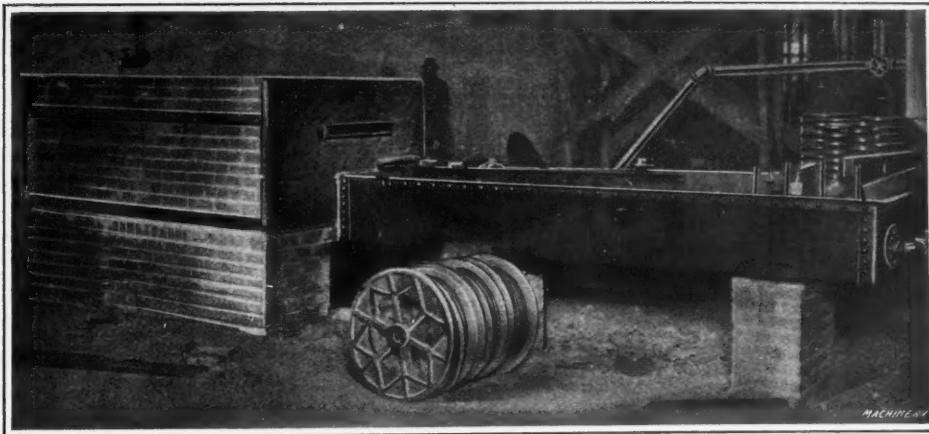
Heating and Quenching Baths for hardening Strip Steel
